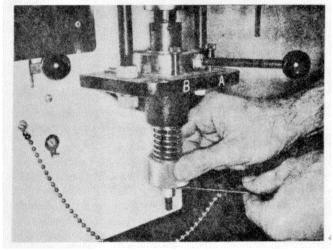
H-33. Adjusting the Knurled Nut for Feeler Gauge Clearance
